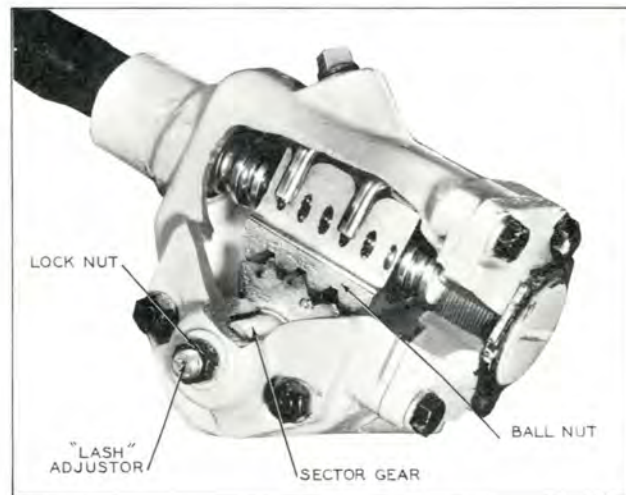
Steering Gear Lash Adjustment (Sector Gear)
